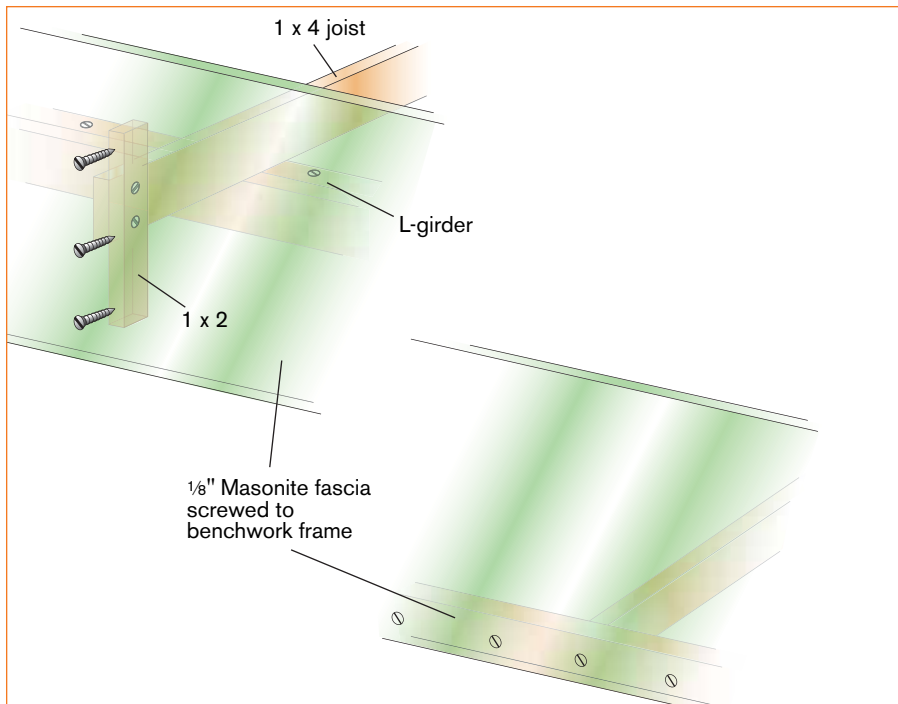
Adding fascia to the benchwork. Pelle screwed 20" Masonite strips into the front edge of the benchwork (both L-girder and open-grid benchwork shown).
